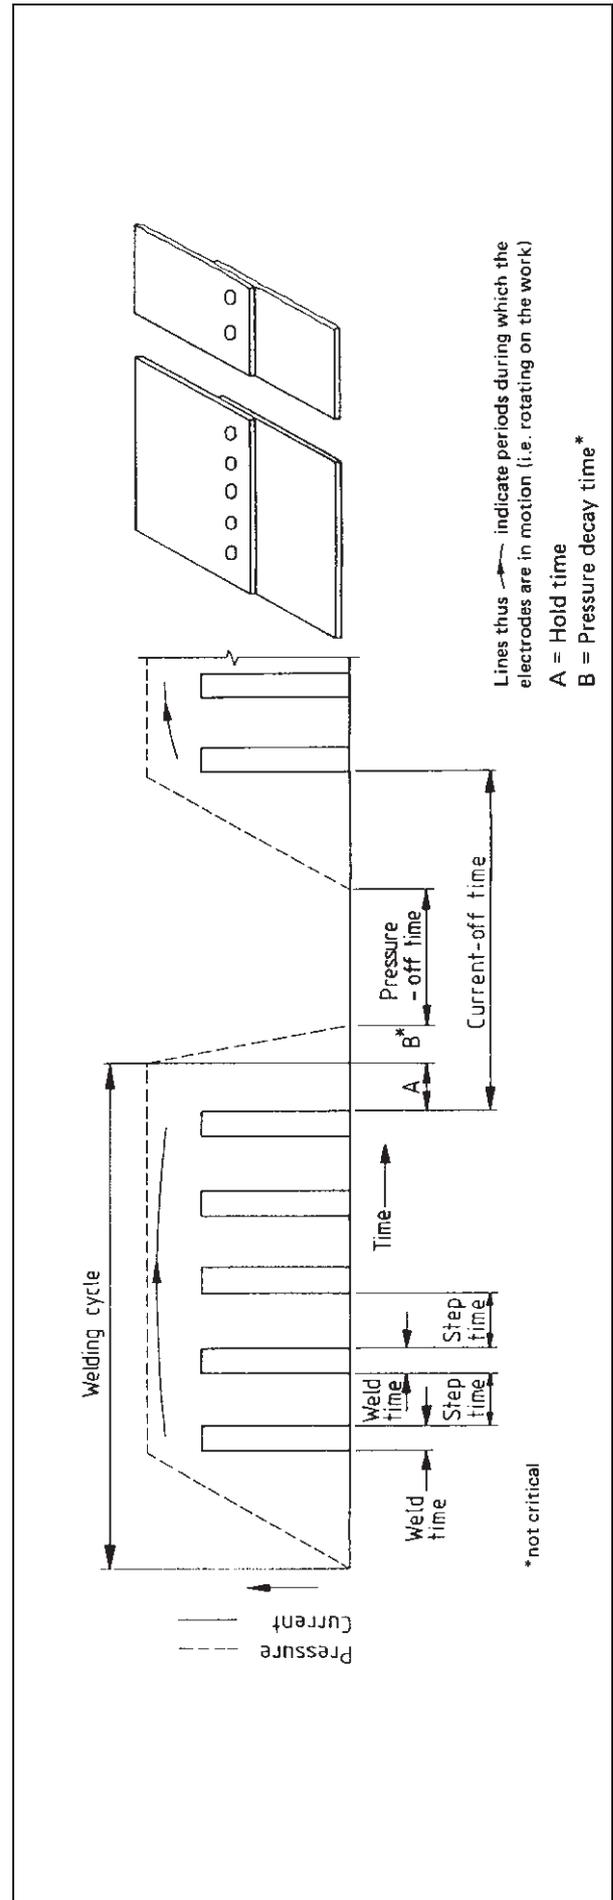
Time and pressure diagram for step-by-step roller spot welding
